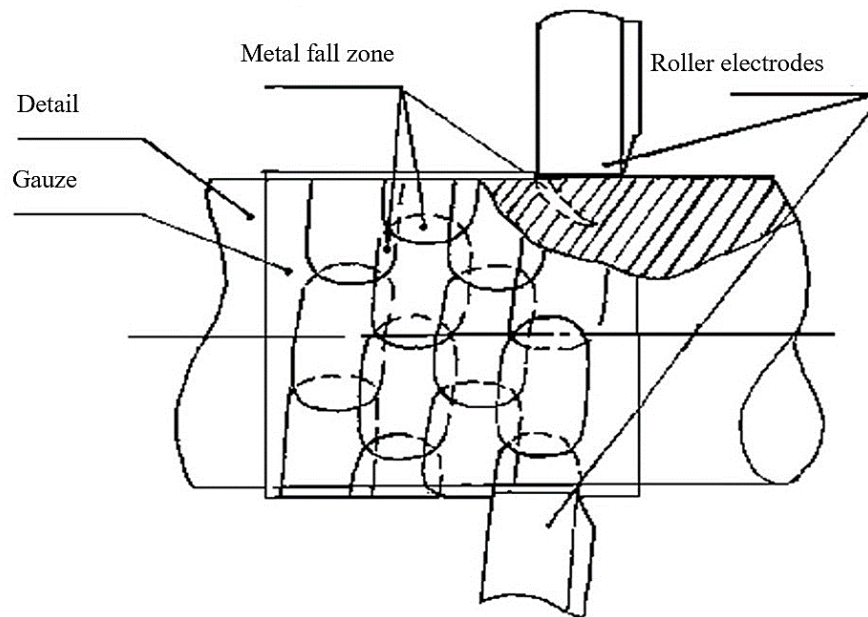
Diagram of the weld spots' location during electro-contact welding.
